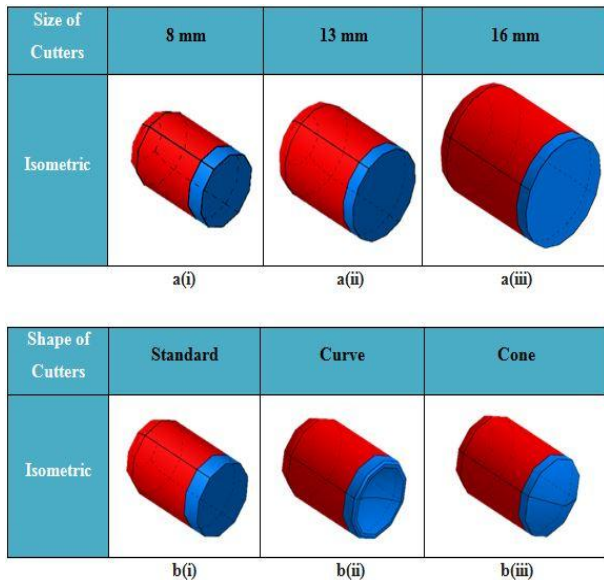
a(i) 8mm bit cutter. a (ii) 13mm bit cutter. a(iii) 16mm bit cutter. b(i) standard shape cutter. b(ii) curve shape cutter. b(iii) consshape cutter
